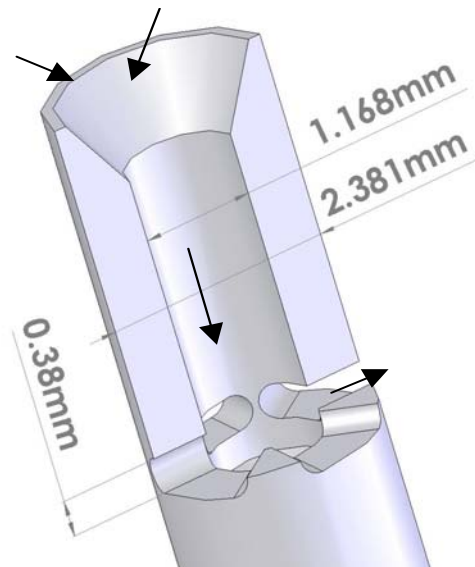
Cutaway view of the rotary shaft pump (RSP) impeller. Shown in the radial 4-blade impeller. Arrows indicate flow direction.
